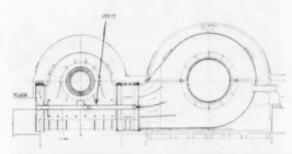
Cross-sectional view of turbine, Fig. 2, pictures how internal strut and expansion joints permitted cross-under duct to alleviate pressure forces on duct ends
